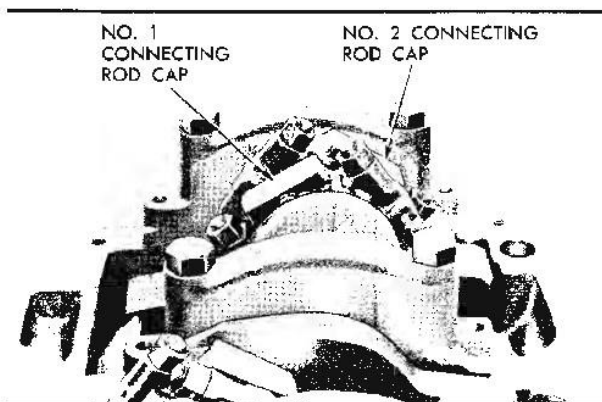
Crankshaft Positioned for Removal of No. 1 and No. 2 Connecting Rod Caps
